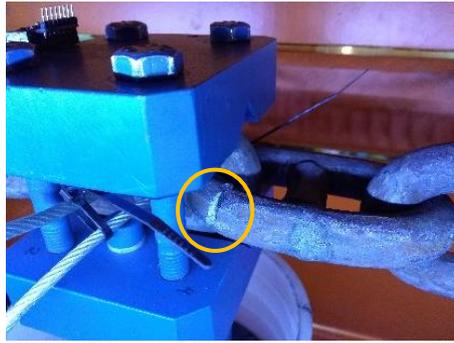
Fatigue failure due to out-of-plane bending.
